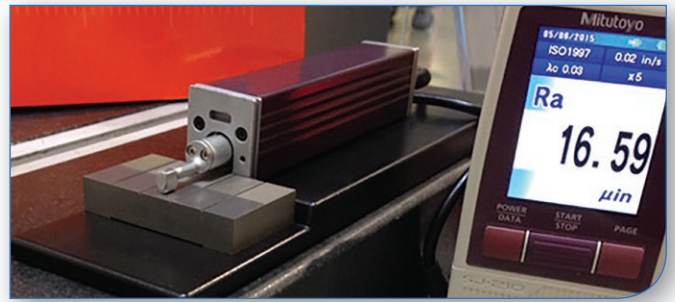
is a test piece of hardened tool steel with five wire cut surface areas, cut under different conditions. One half of the thickness of the block was then masked off,
